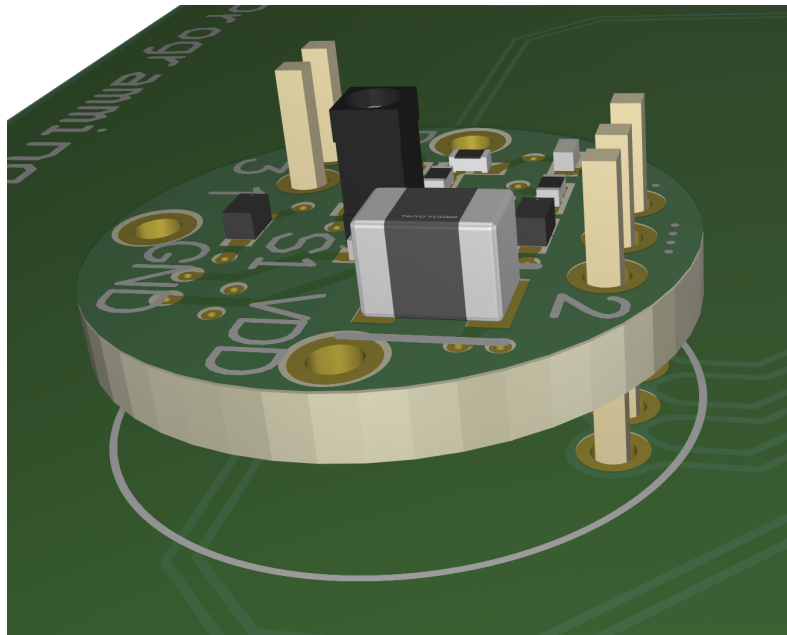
Close view of PCB1 placed on the five 1.27 mm PCB headers on the programming board
